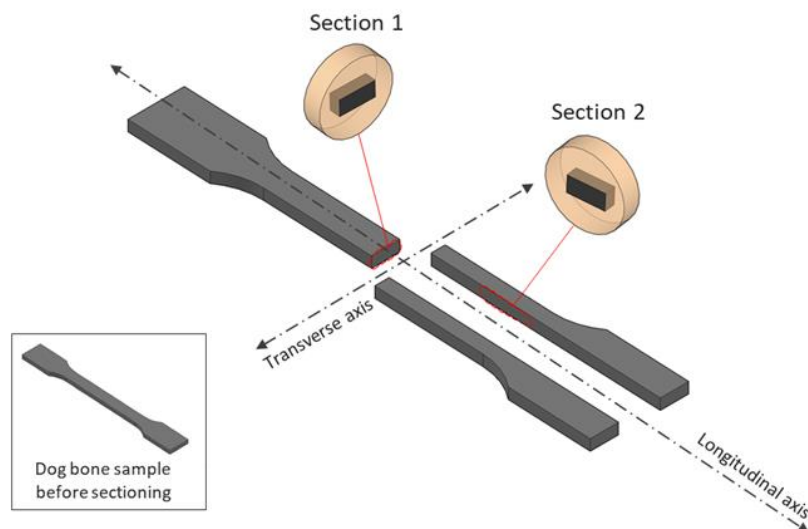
Schematic drawing of Section 1 and Section 2 taken from the sample.
